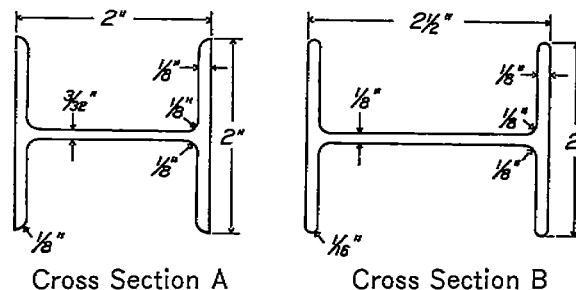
Dimensions of extruded 24S-T H-sections.
